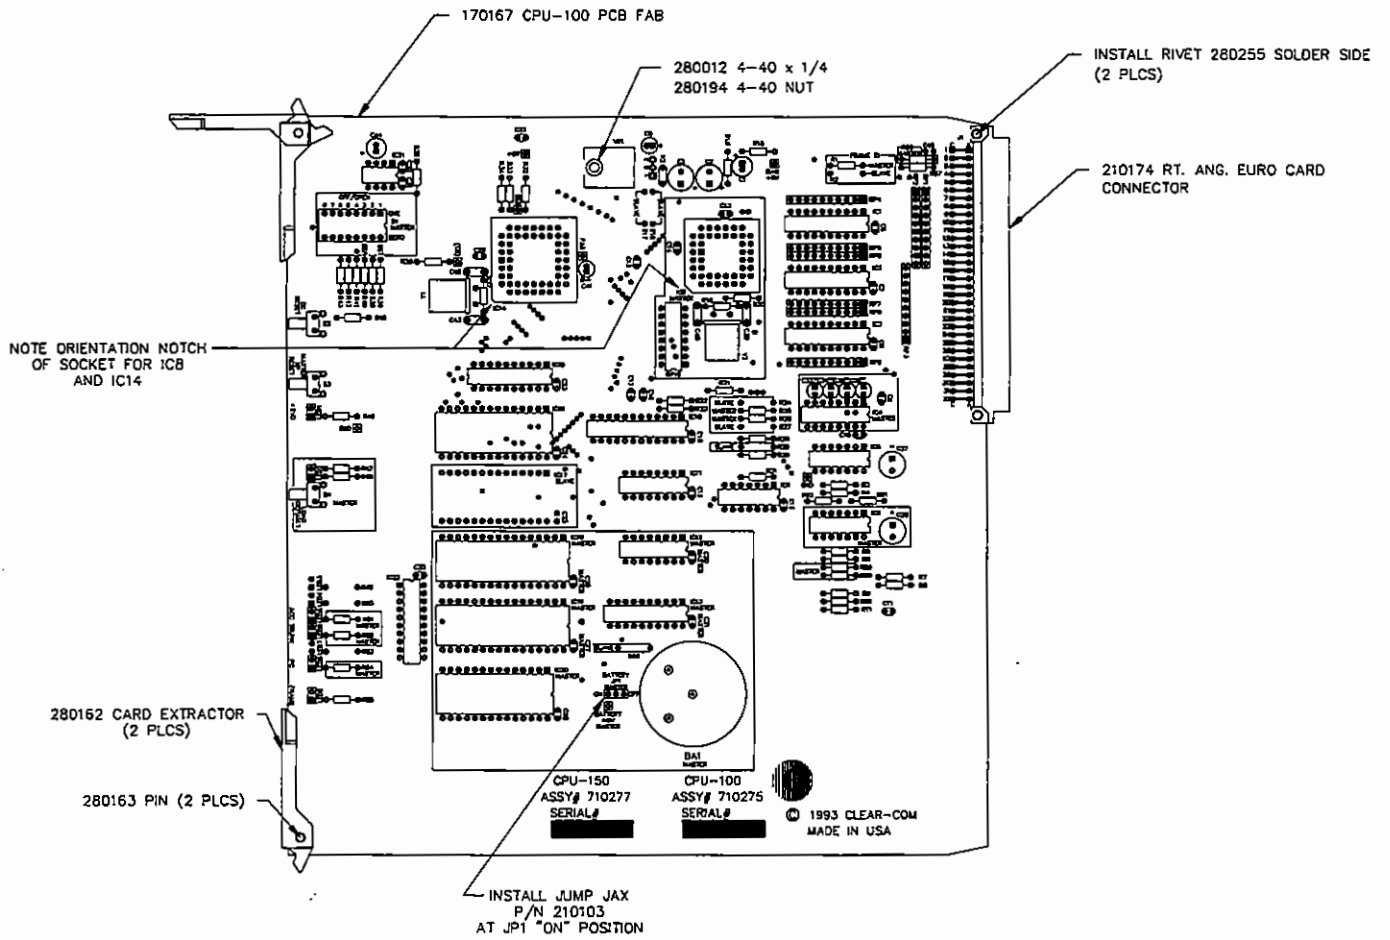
Assembly Drawing - CPU-100 PCB Rev. C
